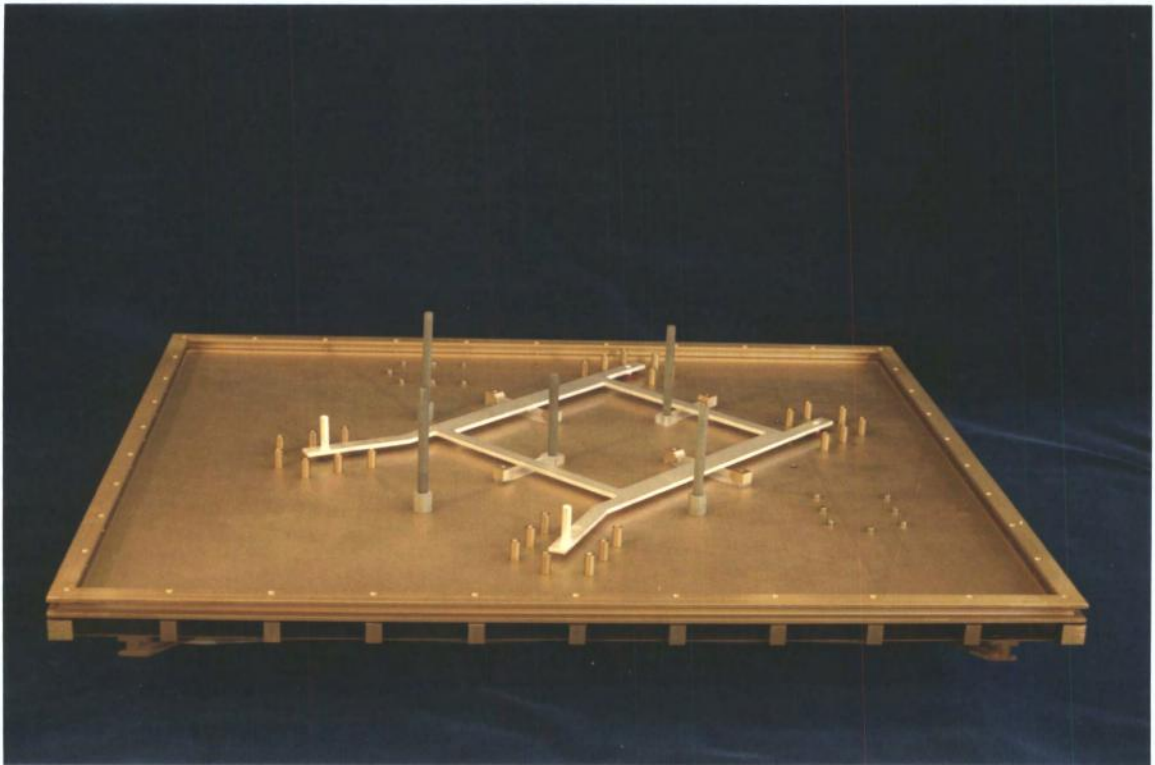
PHOTOGRAPH OF ENGINEERING MODEL DURING ASSEMBLY
